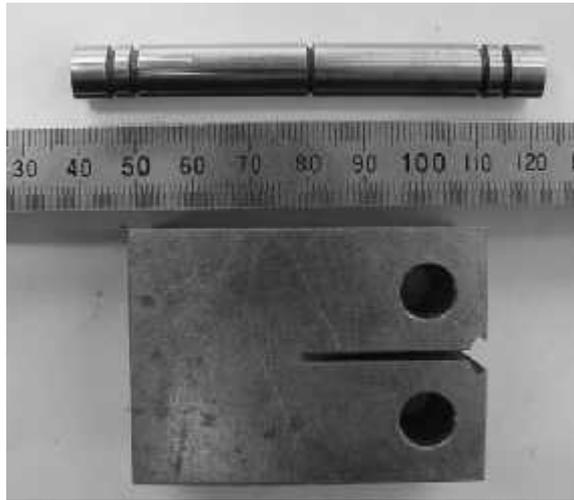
A valid ASTM CTT specimen (bottom) compared to cylindrical CNT specimen for the same material.
